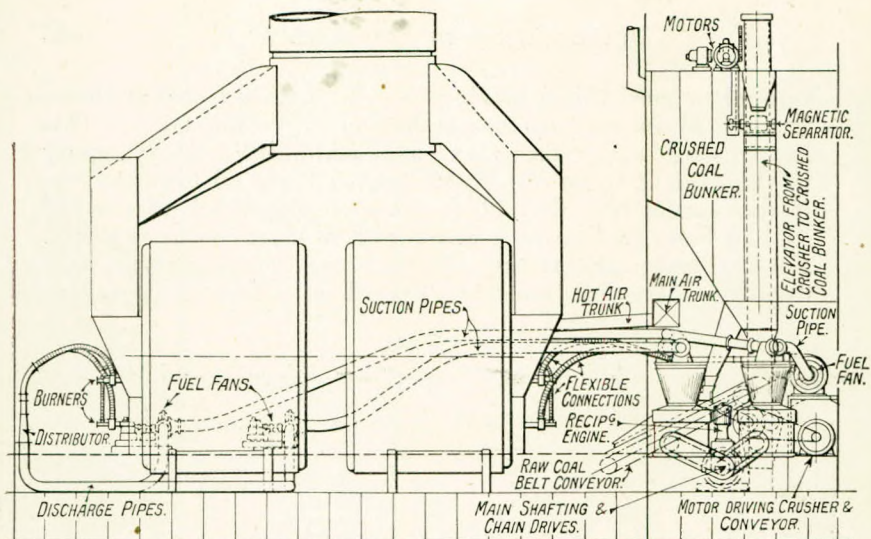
Arrangement of Pulverising Plant looking from Starboard to Port.
